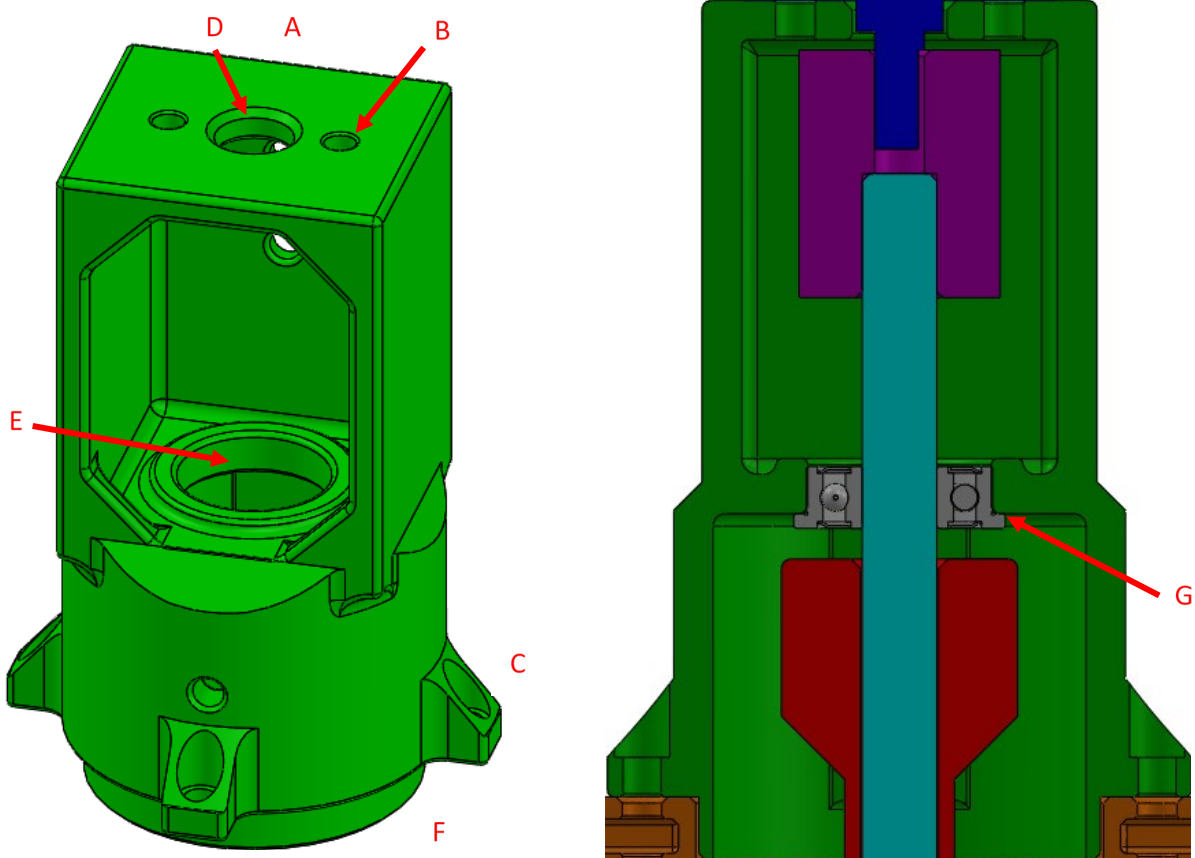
CAD of the version 1 motor mount. This part is approximately 2.8” tall.
